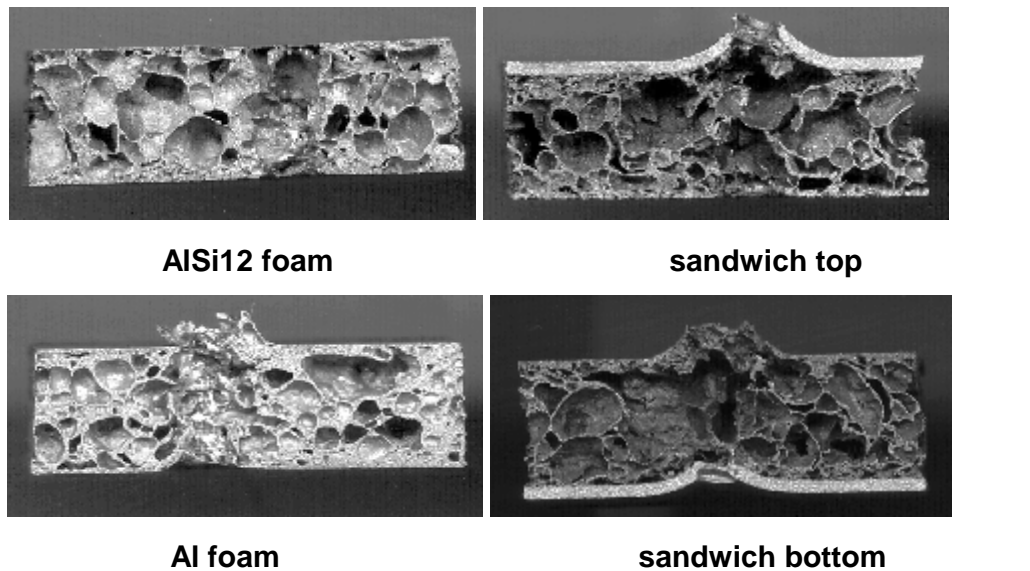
Cross sections of various joints after pull out. (screw: $f = 4$ mm, rectangular specimens $L = 10$ mm, right - direction of applied force)
